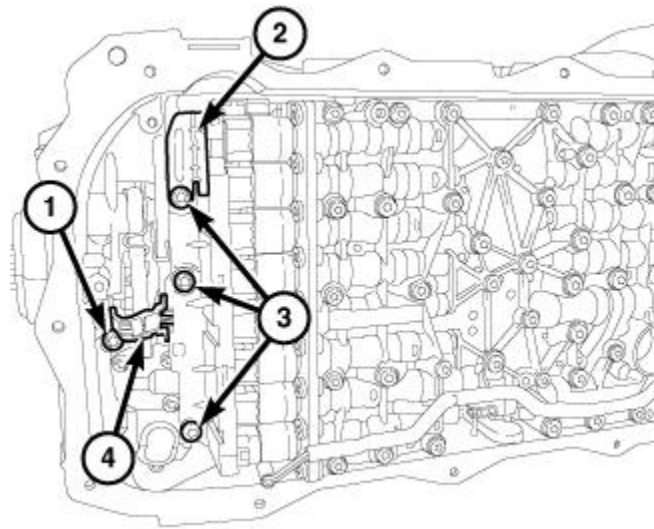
Hydraulic Impulse Storage Unit & Bolts
